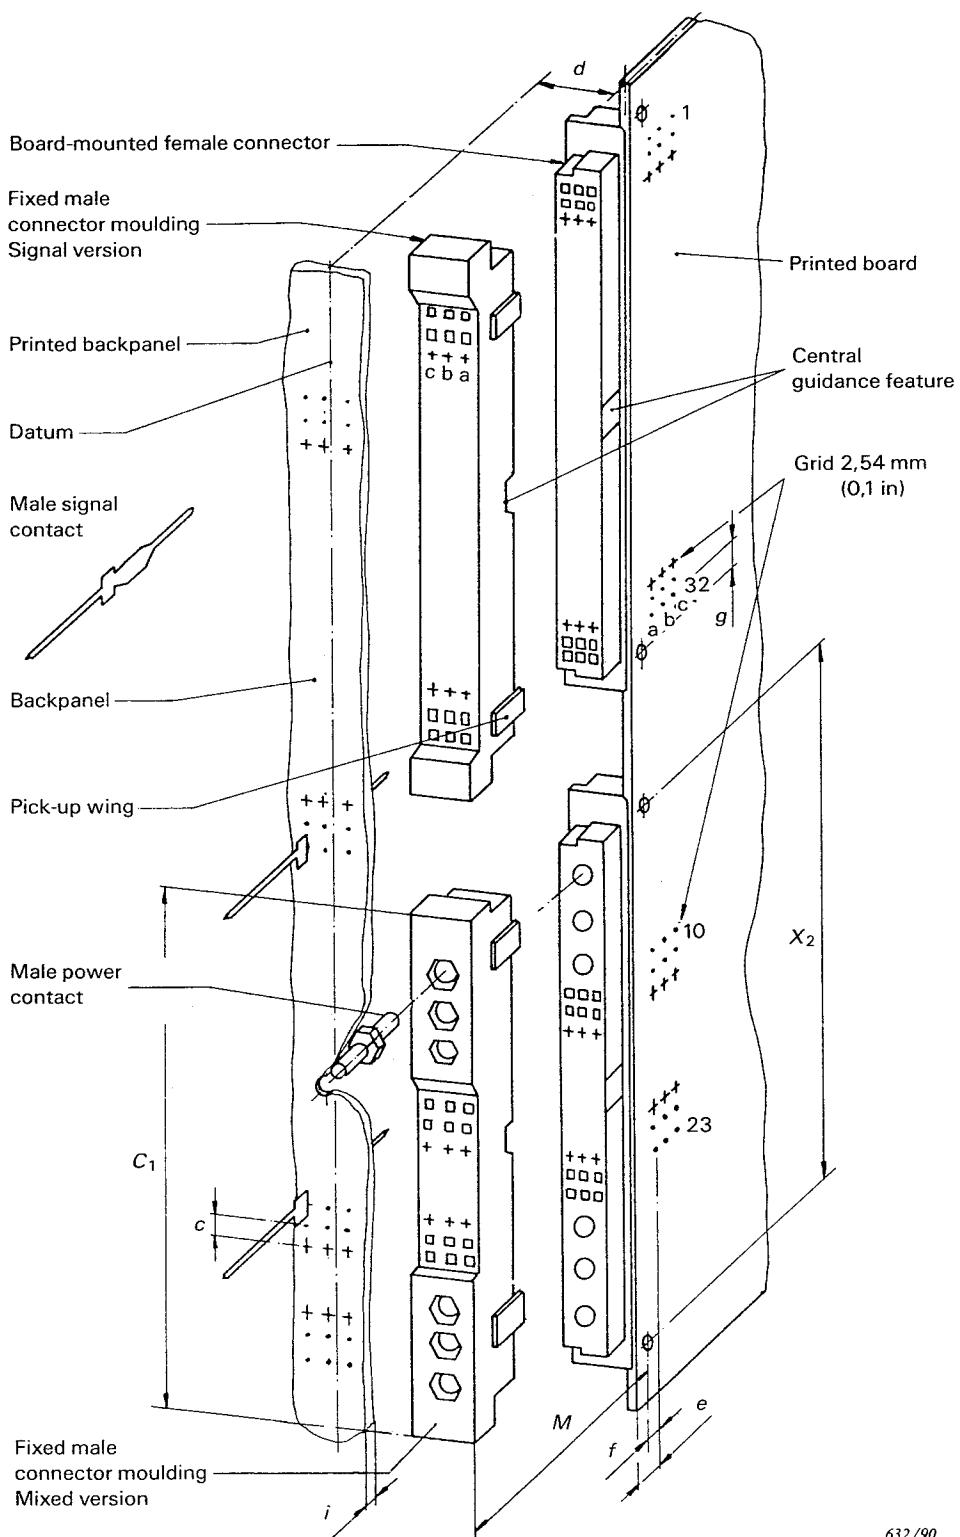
Isometric view and basic dimensions for connector system, range 1
